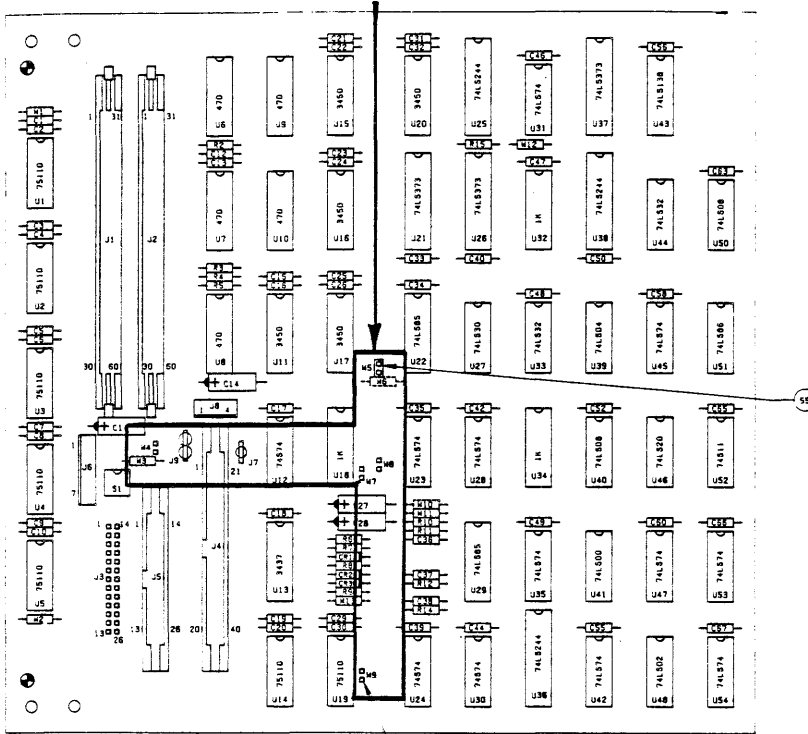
I/O ADAPTER PWA ASSEMBLY
